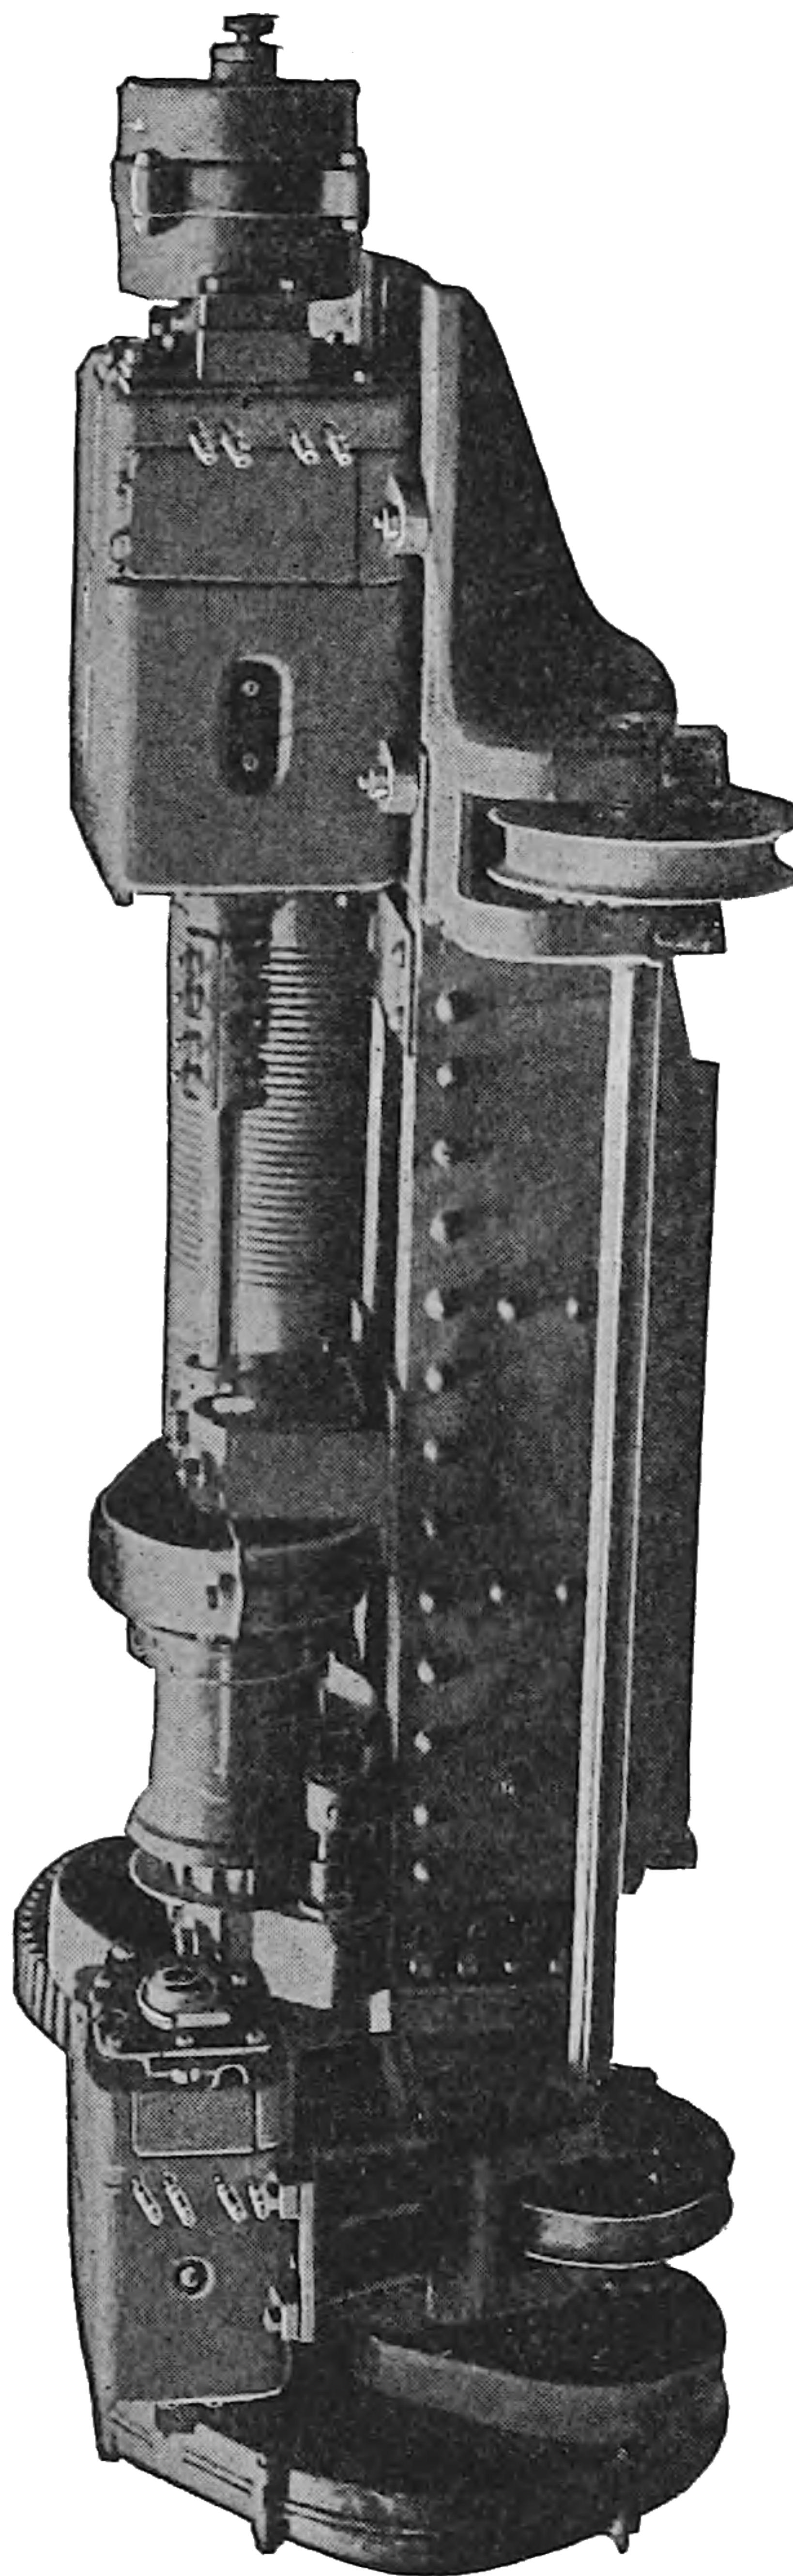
Traveling Crane Operated by Crocker-Wheeler Motor
